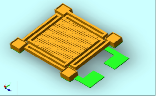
Mold mask to pattern mold photoresist before electroplating
